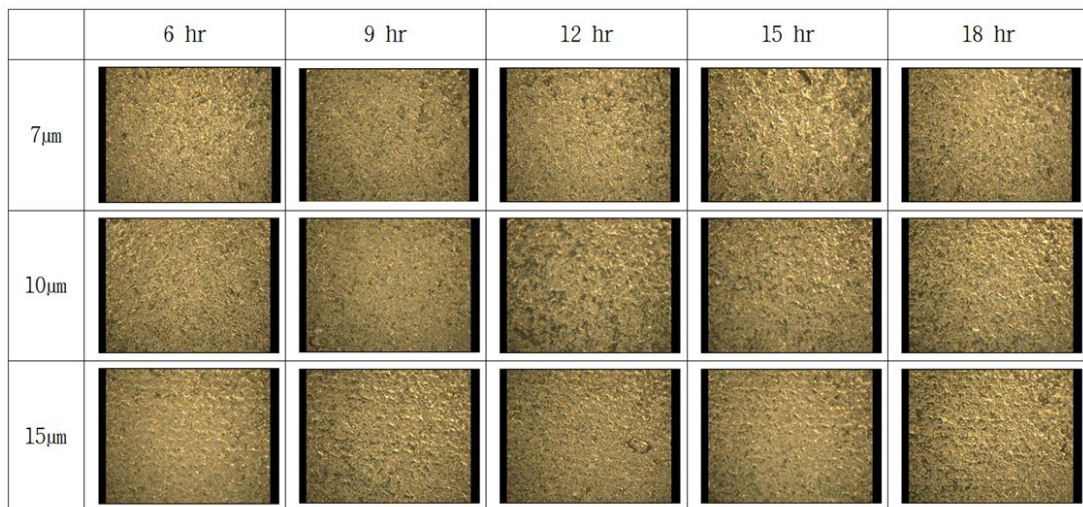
Photographs of tooling surfaces after tooling time by DLC coated thickness
